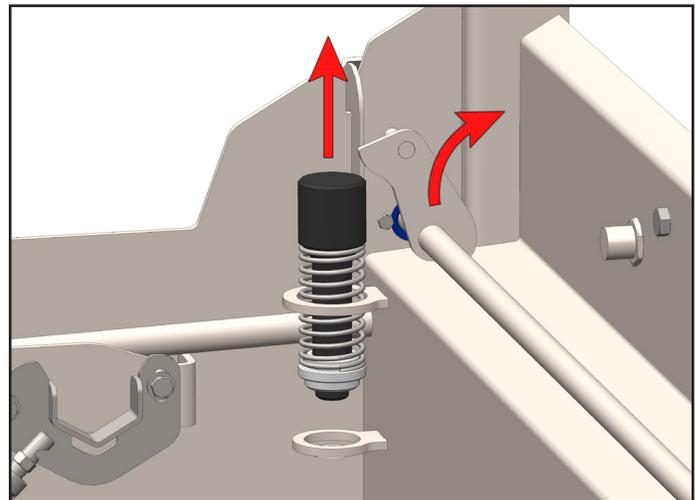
Balancer Weldment rotation to remove Spring
